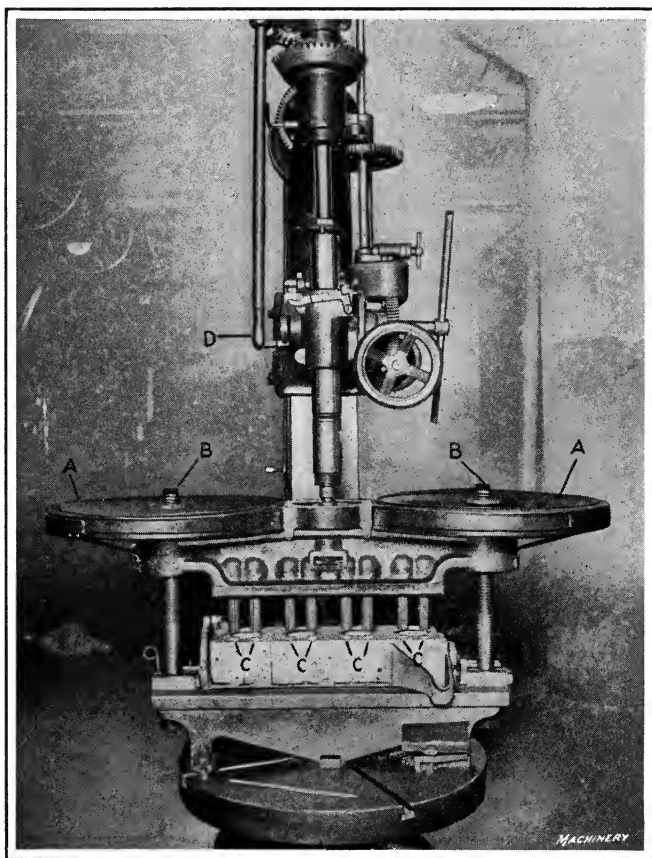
Reversing Drilling Machine equipped for Broaching Push-rod Guide Slots in Crankcases
